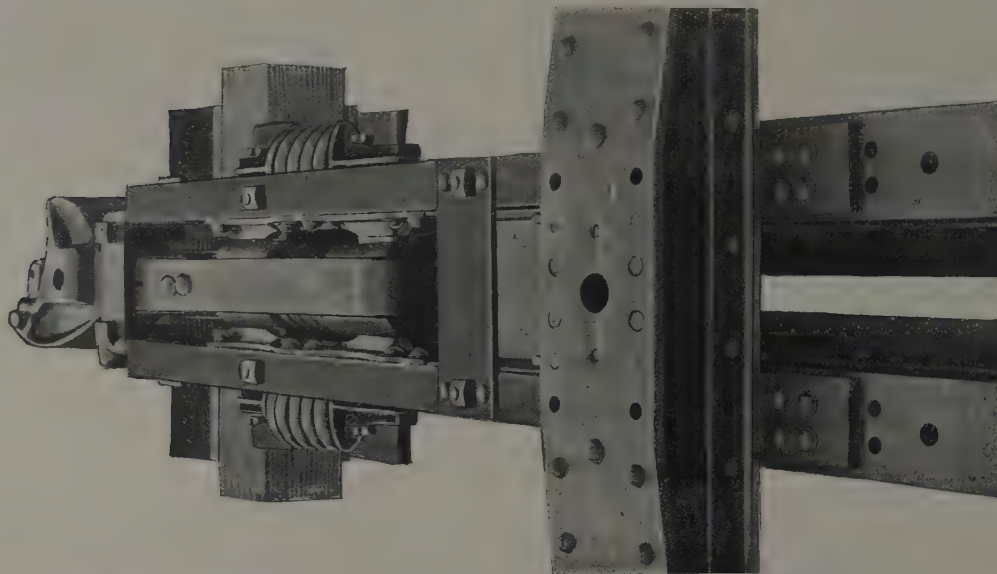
Bradford Structural Draft Arms and Three Spring Draft Gear. Bottom View.
